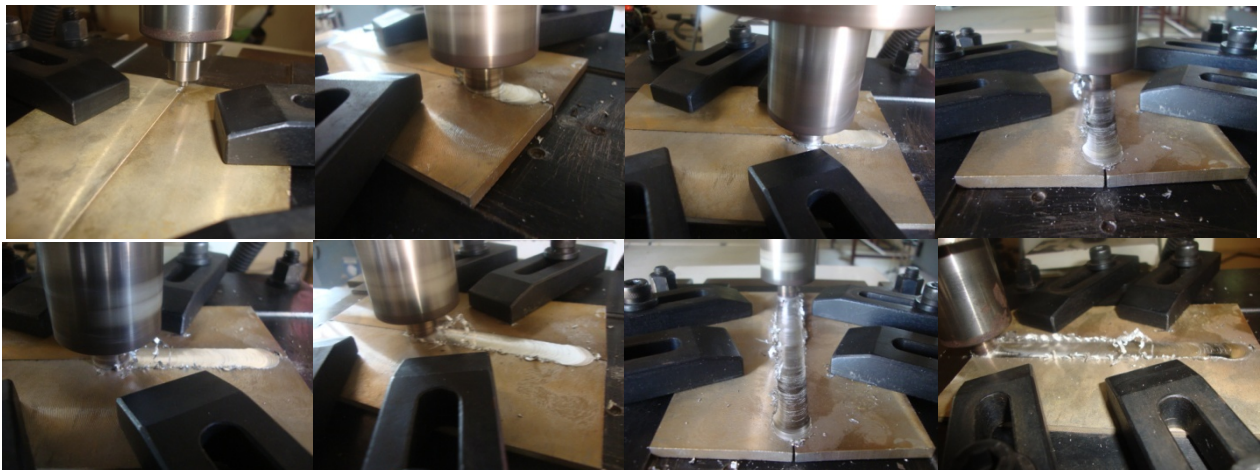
Different stages of fabrication of flat wrought AZ80A Mg alloy plates into sound quality joints by employing the stepped cylindrical shoulder FSW tool with tapered pin profile
